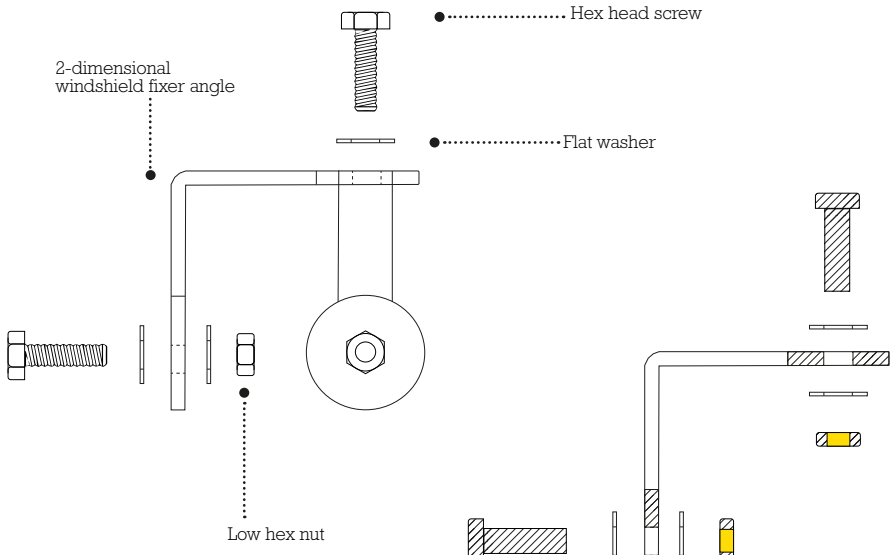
Construction detail - Main joint components | Side elevation and section.
